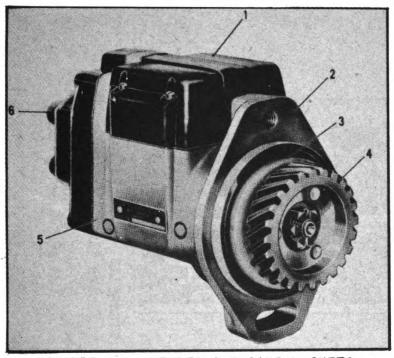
STARTING ENGINE MAGNETO 1. Magneto cover. 2. Mounting flange. 3. Impulse coupling. 4. Gear. 5. Frame. 6. Number 1 terminal on distributor block.
